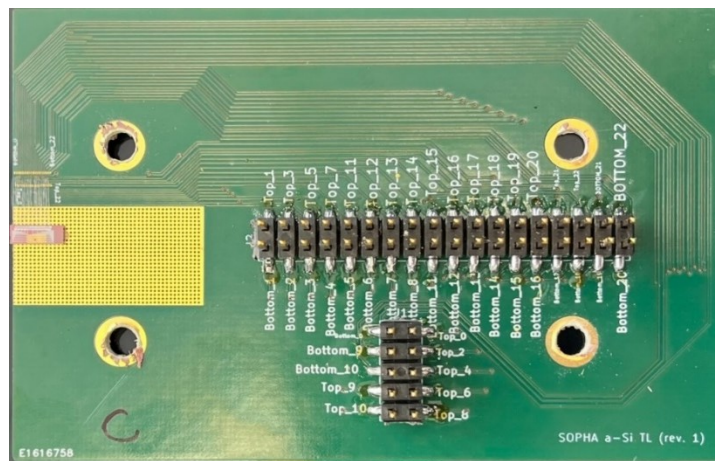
A wire-bonded and soldered connector for aSi on the PCB
